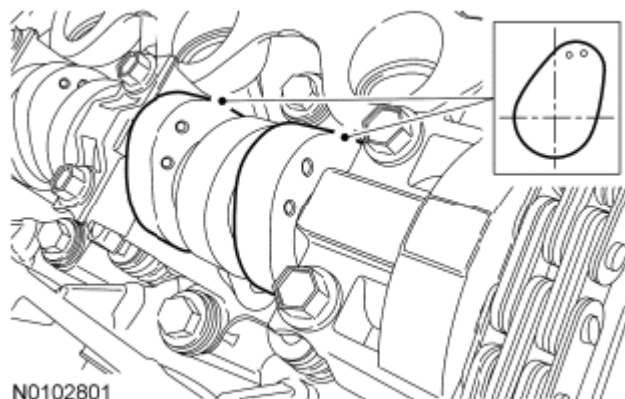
Identifying No. 1 Cylinder Intake Lobes
